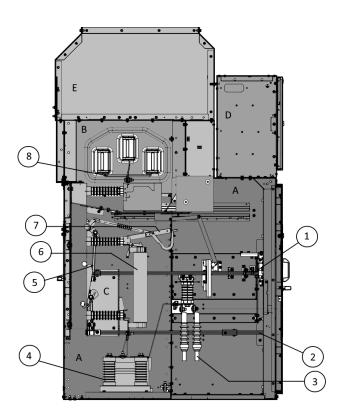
Sectional view of contactor panel with panel width 600 mm
